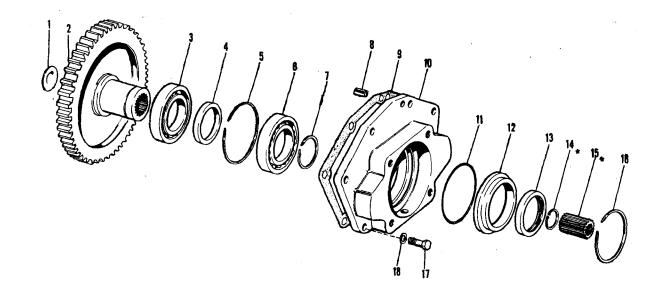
SAE "C" Power Pump Mounting Group of Parts - Exploded View.
